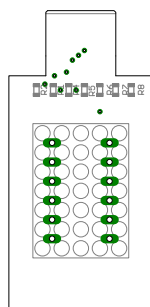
inTouch LED Matrix Board Component Top Layout
